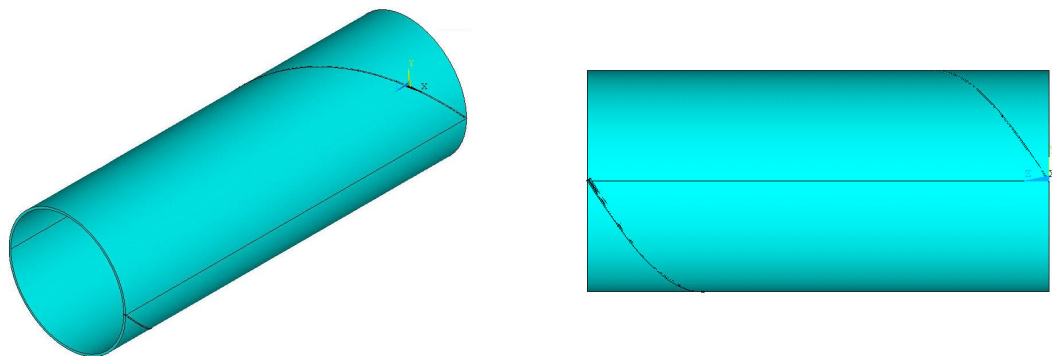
3D model of 56-inch spiral welded pipe for one complete pitch
